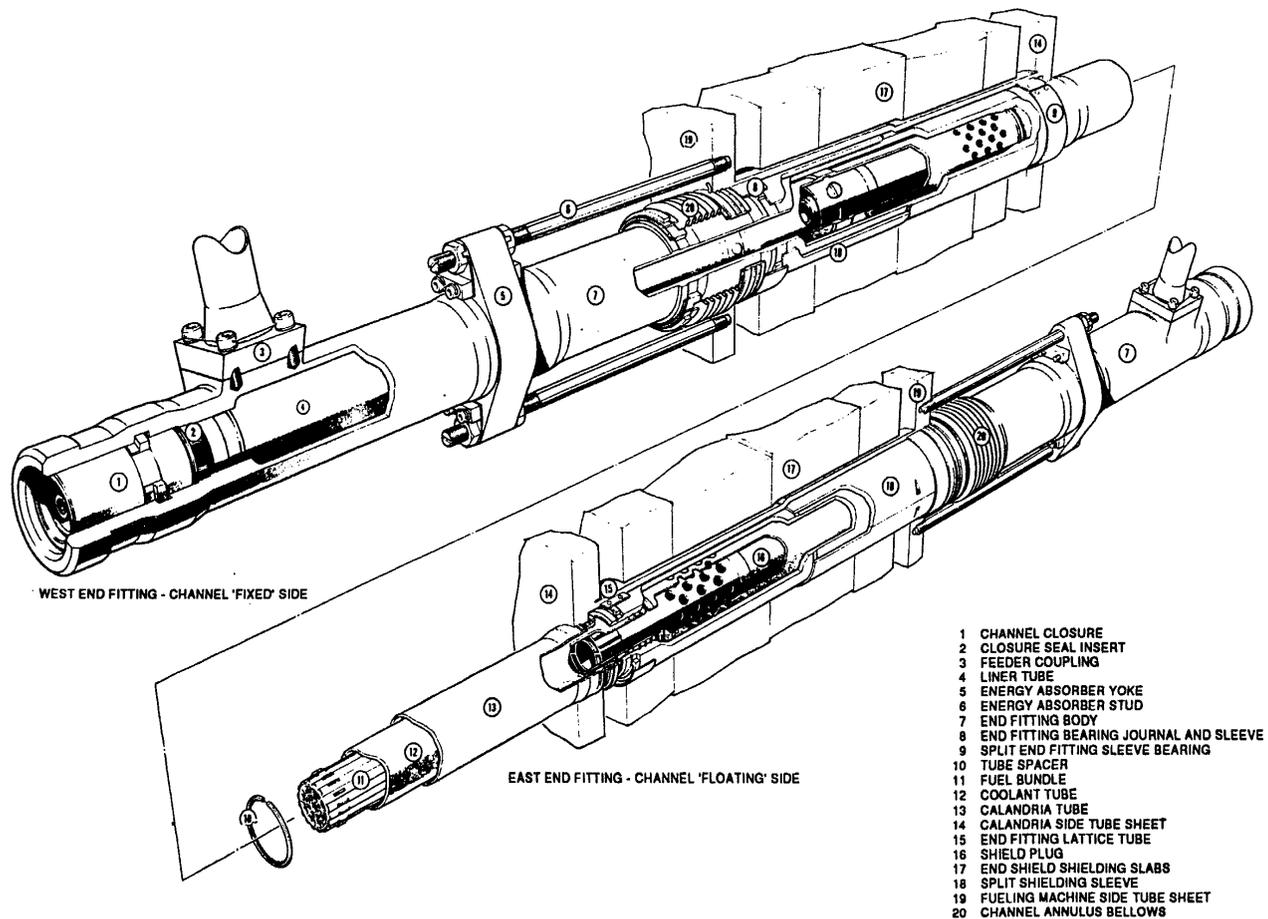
FUEL CHANNEL ASSEMBLY
